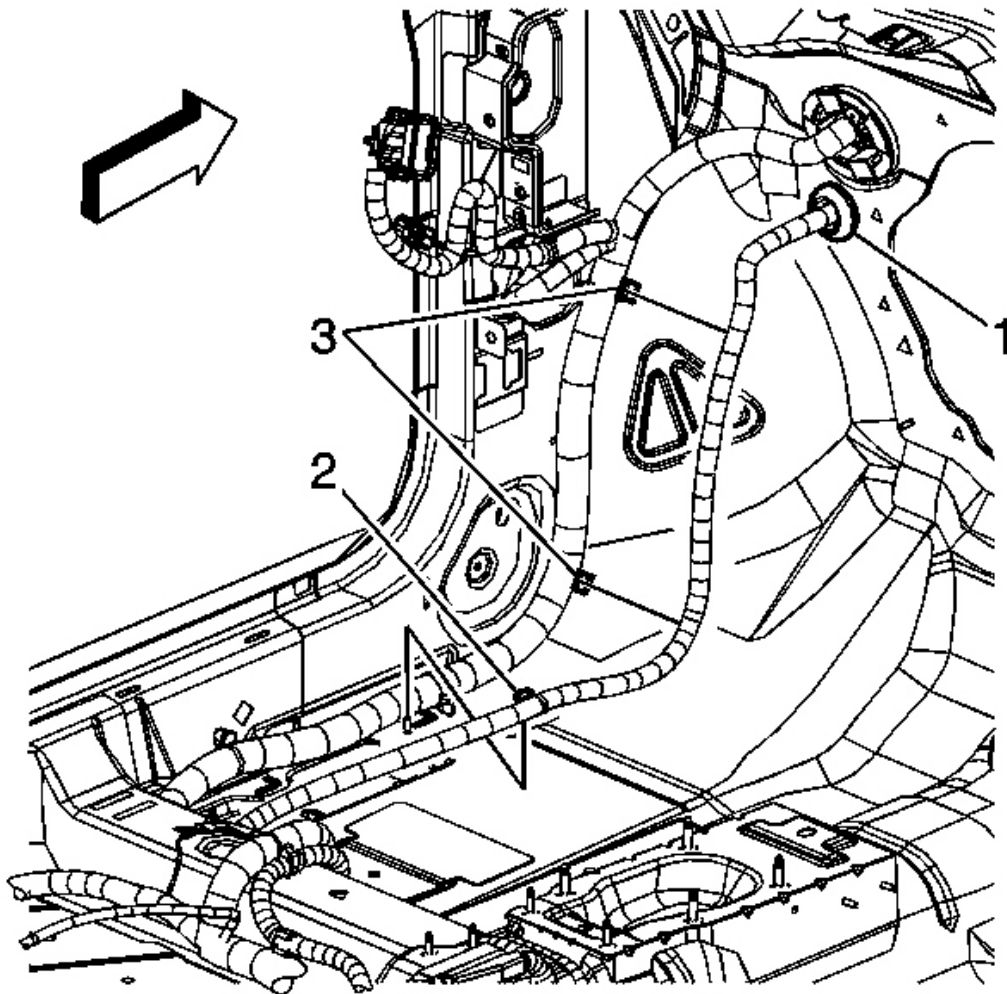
View Of Positive Battery Cable Clip To Weld Stud
